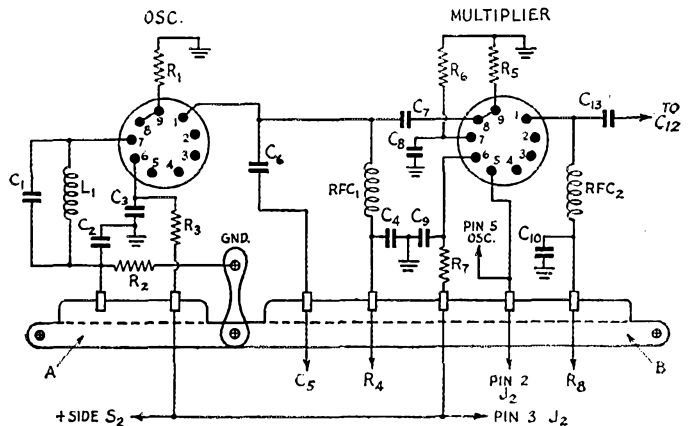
Drawing of the parts layout for the exciter subassembly. A and B are 2- and 5-terminal tie-point strips.
